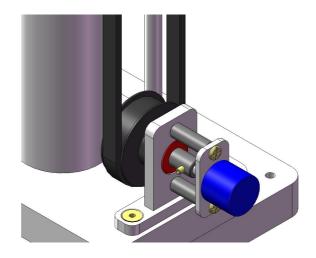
3D model of the assembly of the bottom Vertical Pulley Holder and other components.
